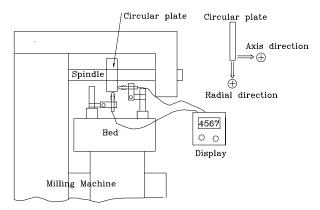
Setting of equipment on the knee type horizontal milling machine for measuring the thermal expansion
